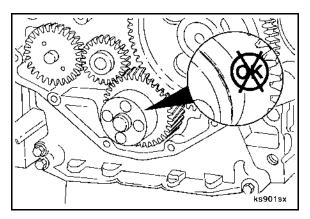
INSPECT THE CRANKSHAFT
